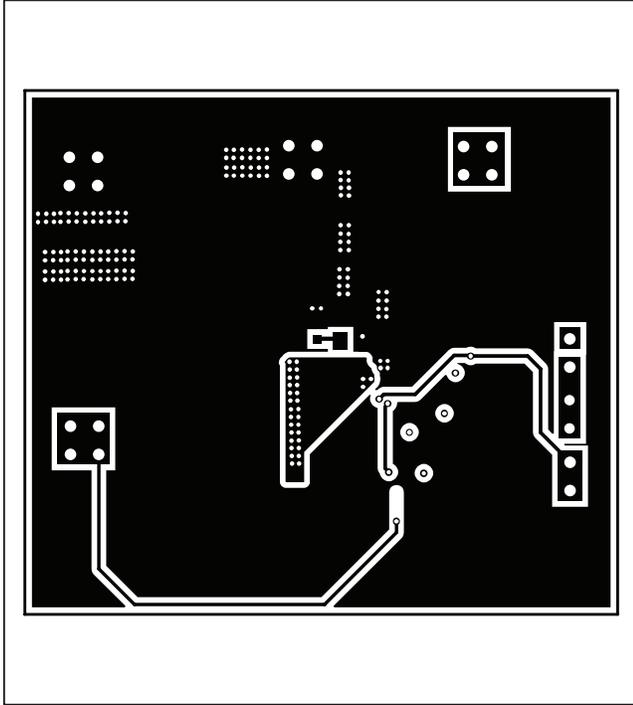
MAX15066 EV Kit PCB Layout—Solder Side
